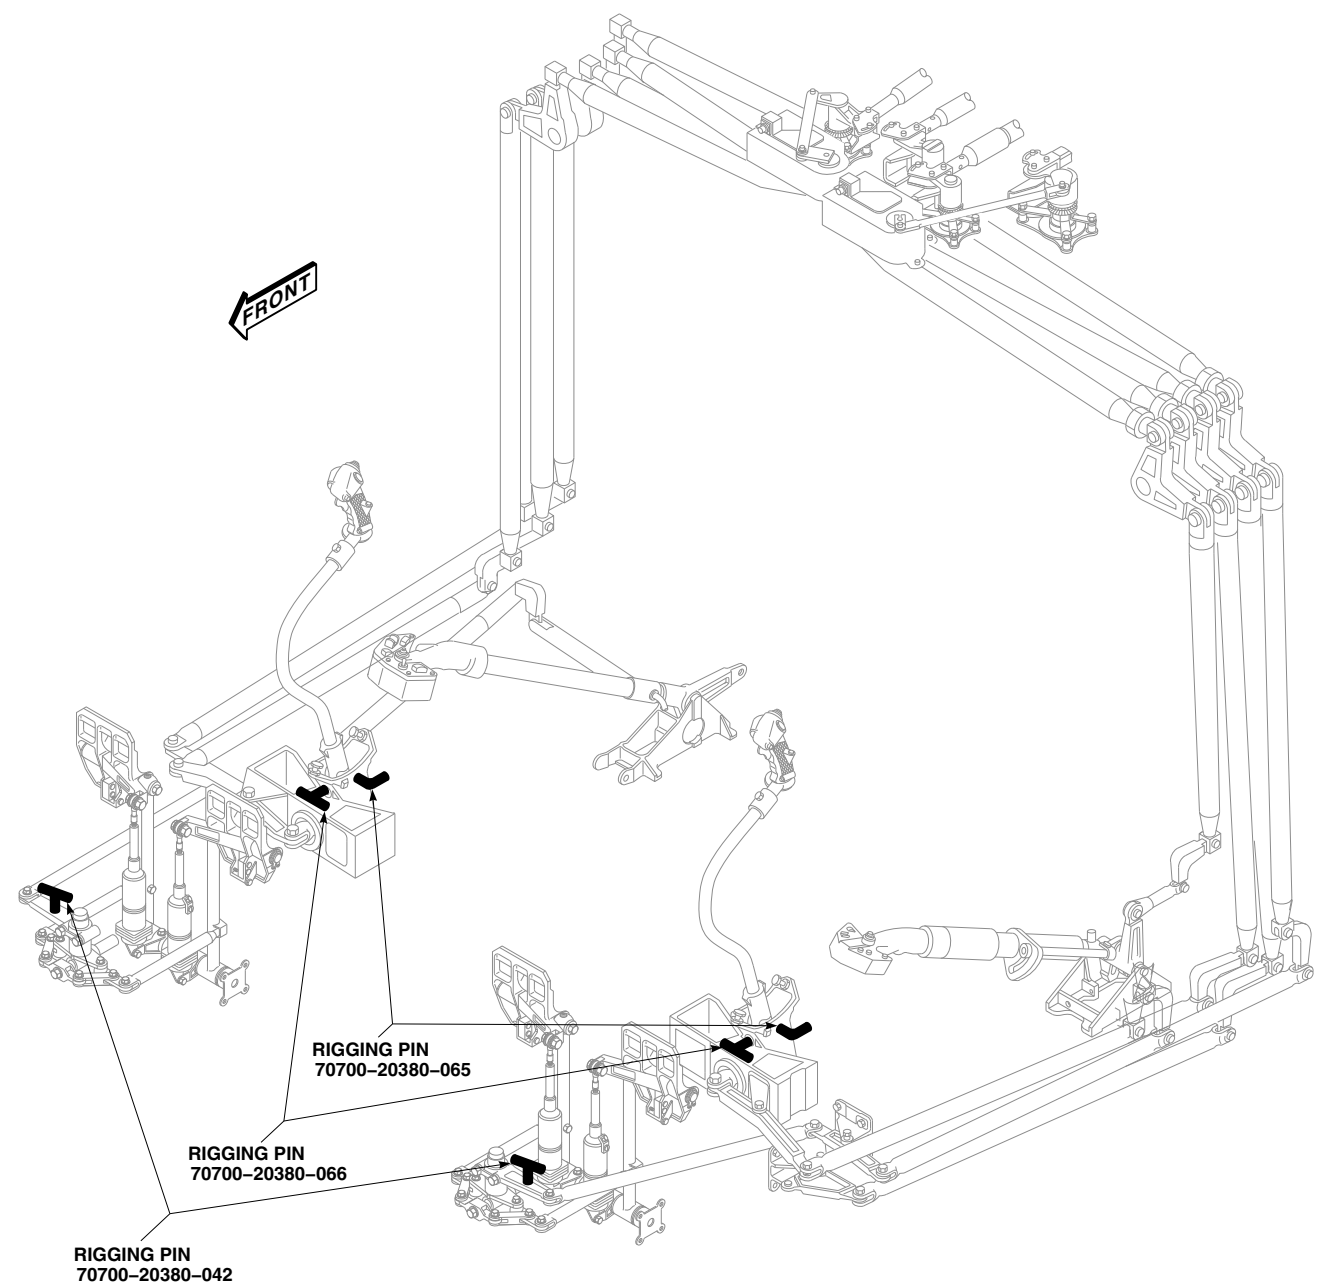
INSTALL TORQUE SHAFT RIGGING PINS (SHEET 2 OF 2)
